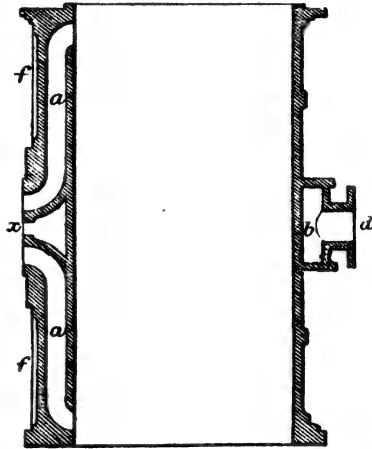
is a side elevation of a large steam cylinder; Fig. 1325 is a sectional elevation; Fig. 1326 represents a horizontal section taken through the centre of the exhaust steam passage; *aa* are the steam passages to the cylinder, *bb* the exhaust passage, all uniting in the face *x*; *d* is the outlet from the passage *bb*.
